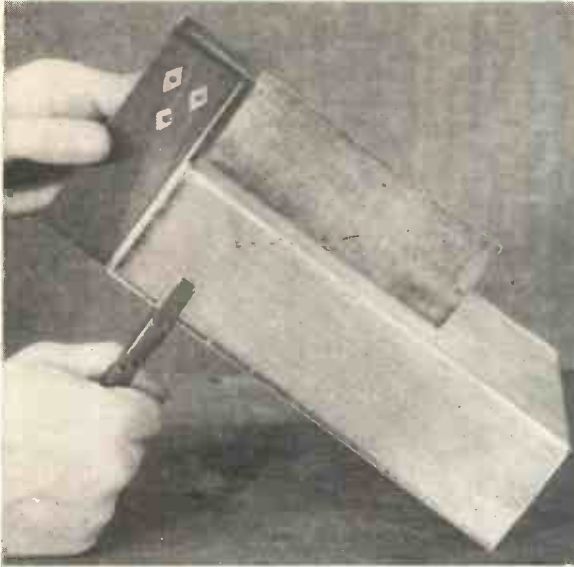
SQUARING UP THE CHASSIS BEFORE SOLDERING.
